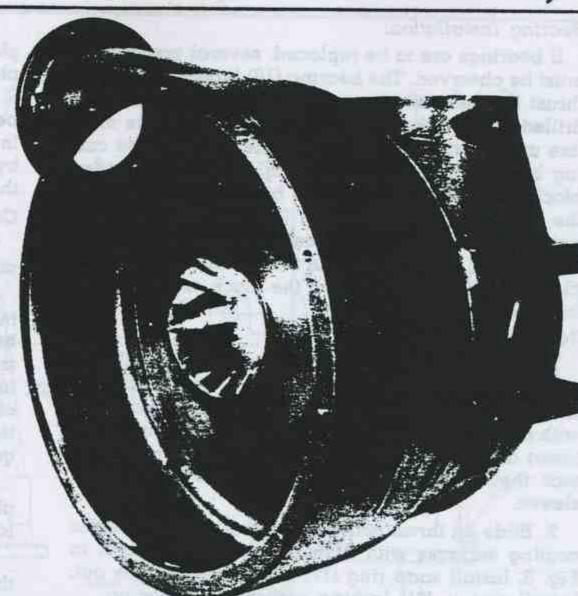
Partially Dismantled View Showing Blower Inlet Removed for Cleaning.
